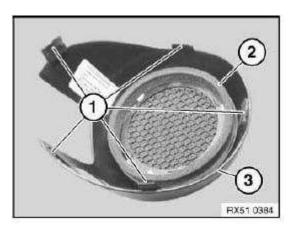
Identifying Catches And Foam Material On Speaker Trim
